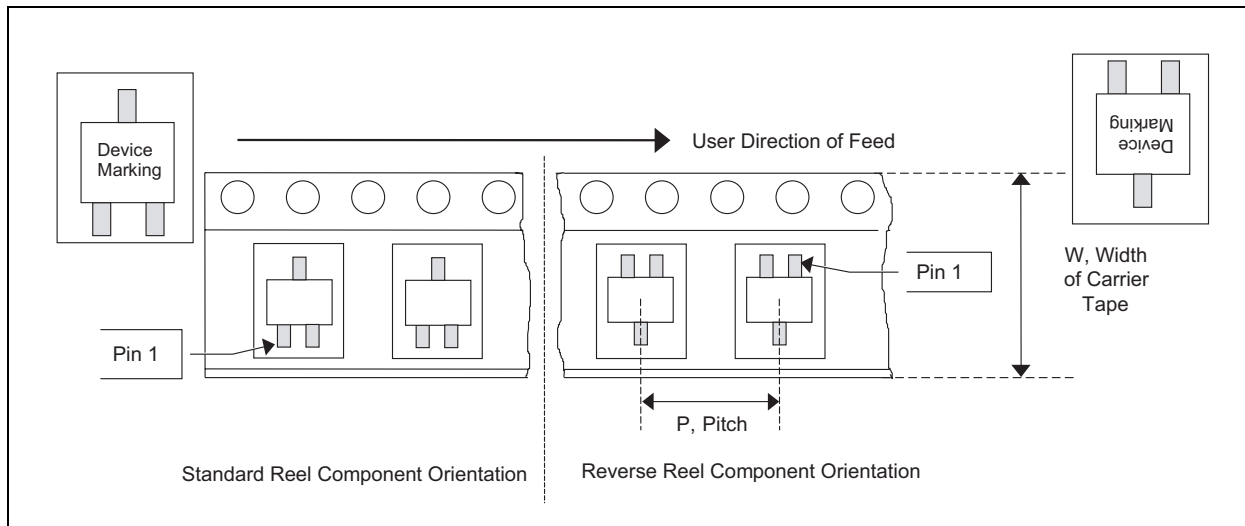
EMBOSSED CARRIER DIMENSIONS (8, 12, 16 AND 24 MM TAPE ONLY)
